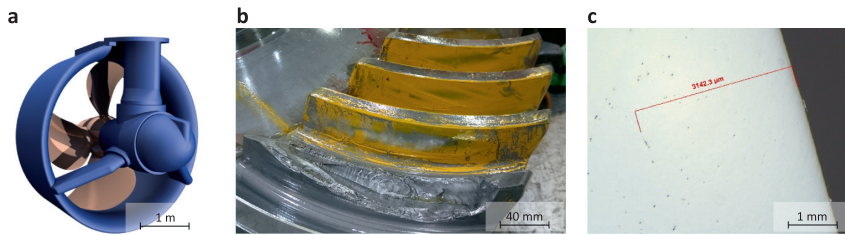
Azimuthing thruster (a) inboard and underwater unit, (b) G1 gear failure and no load contact pattern, (c) G3 gear failure after cutting and polishing.
